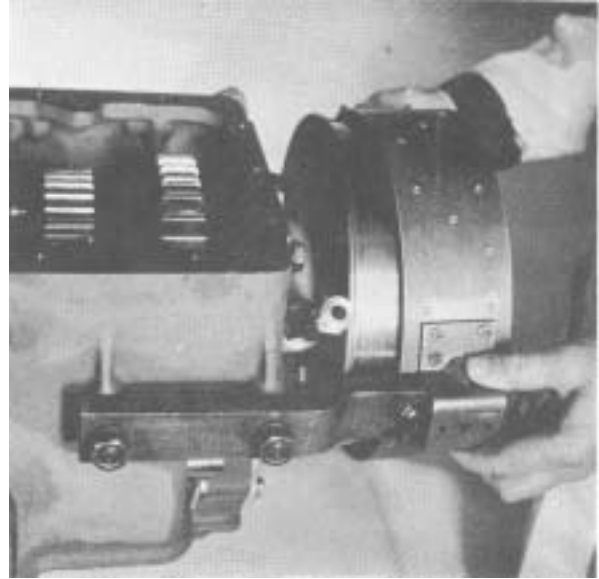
Install anchor clip spring and brake band on anchor support bar.
